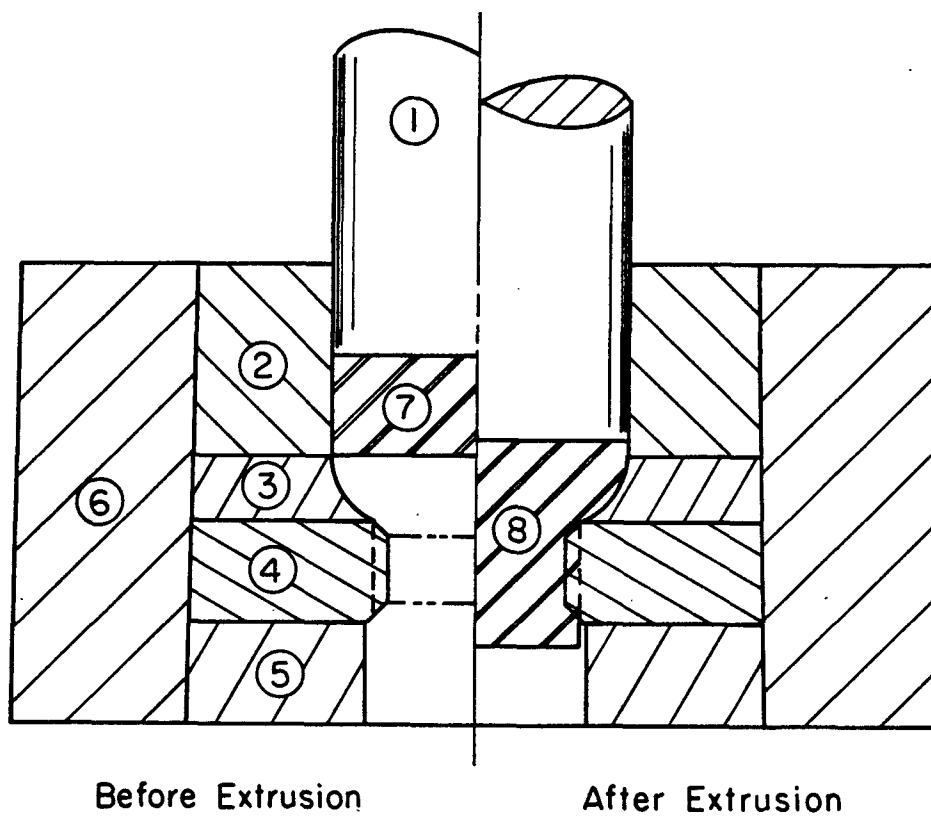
Extrusion Process for Helical Gears Using a Streamlined Die
